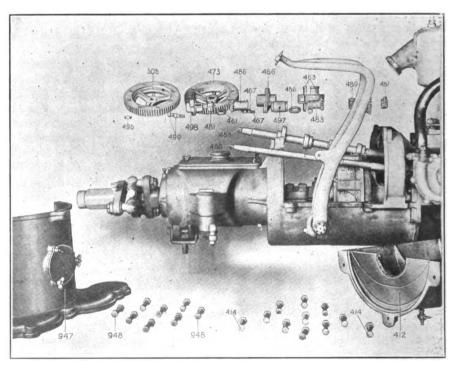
ILLUSTRATING HOW THE CAM AND LAY SHAFTS ARE REMOVED
